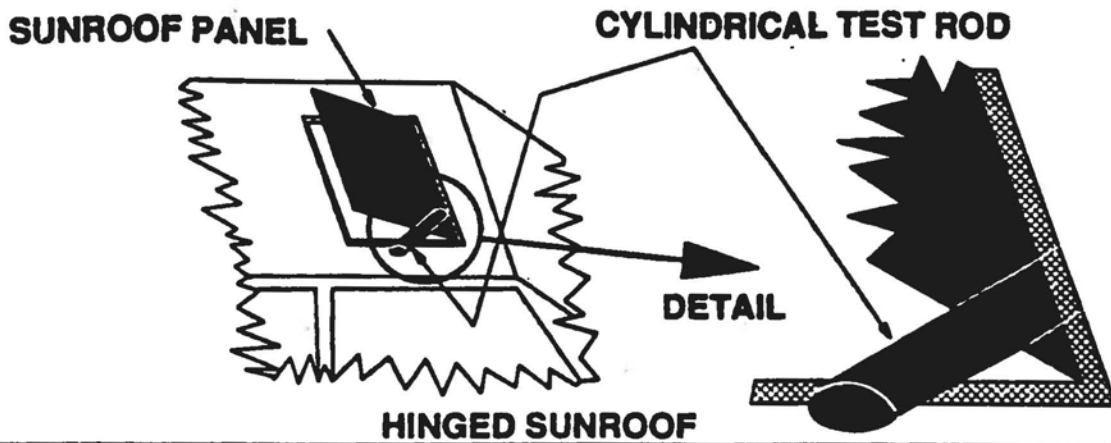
Typical Cylindrical Test Rods Protruding through Sunroof and Window Daylight Openings
